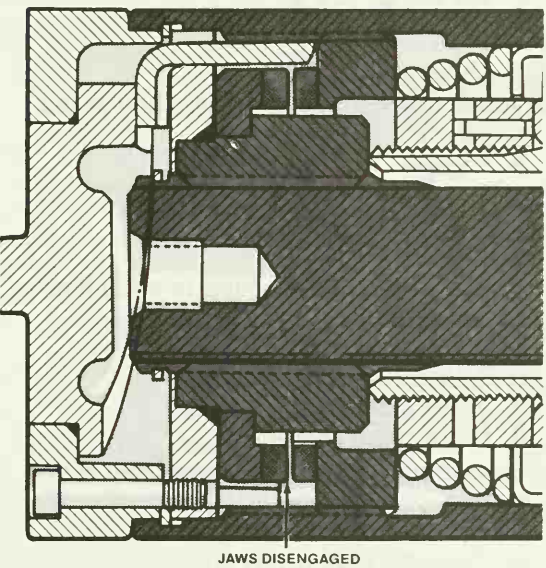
A freewheeling clutch hub in the unlocked position. (Ford Motor Company)
